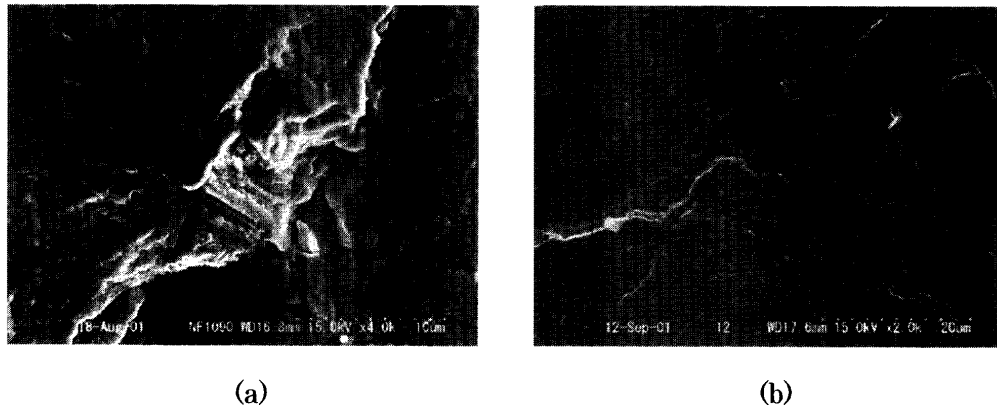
Fractographs for the SCM440 steel. Matrix cracks are the fracture sites. (a) is the case that the fracture site is clearly defined and (b) is not the case.
